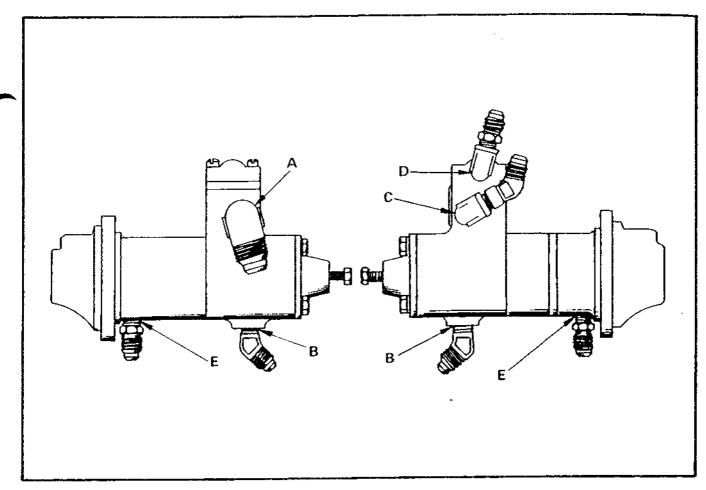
FUEL PUMP AND VAPOR SEPARATOR FITTING LOCATIONS(NEW STYLE)
